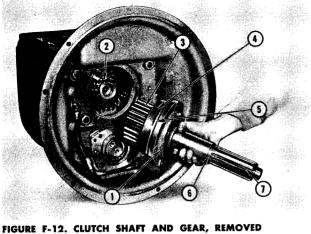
CLUTCH SHAFT AND GEAR, REMOVED 1. Bearing Cover 3. Drive Gear 6. Gear Shield 2. Pilot Bearing 4. Bearing 7. Clutch Shaft 5. Gasket
